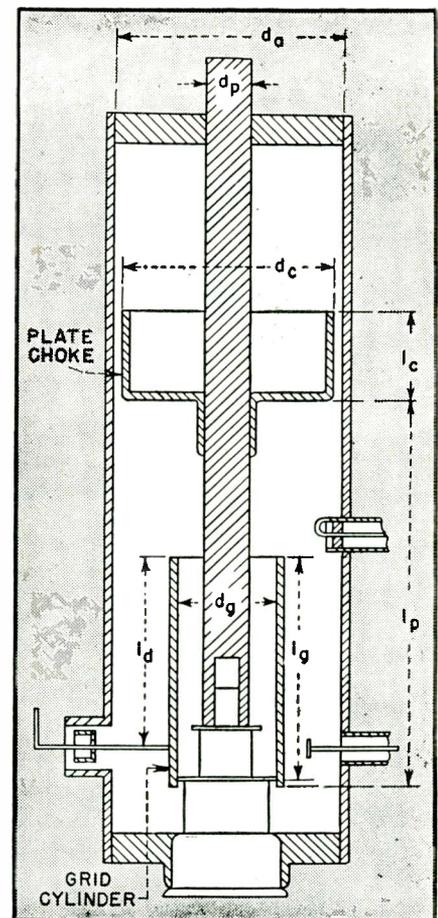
Whereas tuning plungers have both inside and outside sliding contacts, plate chokes must slide only on their inside faces
